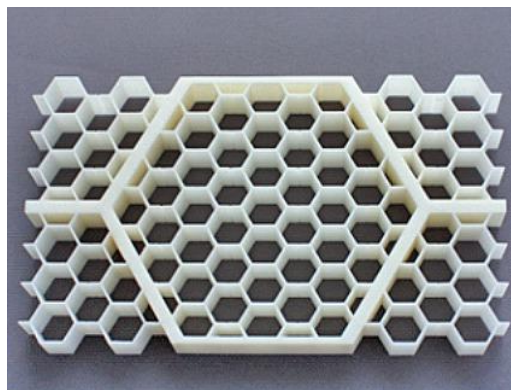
Manufacturing of Honeycomb core using 3D printer
